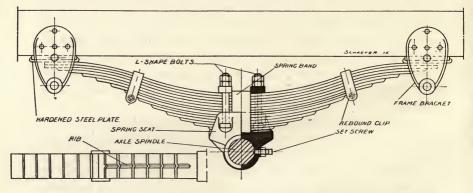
Mogul Six-Ton Rear Spring with Plain Ends Showing Method of Mounting on Axle.
